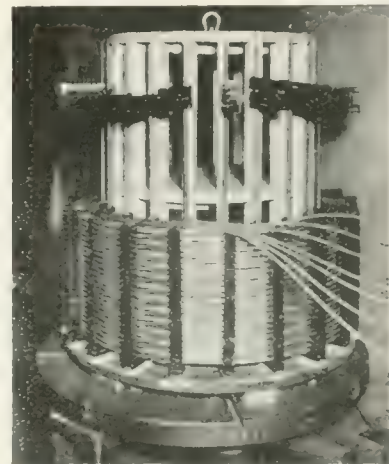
DETAIL VIEW OF COIL IN FIG. 3
